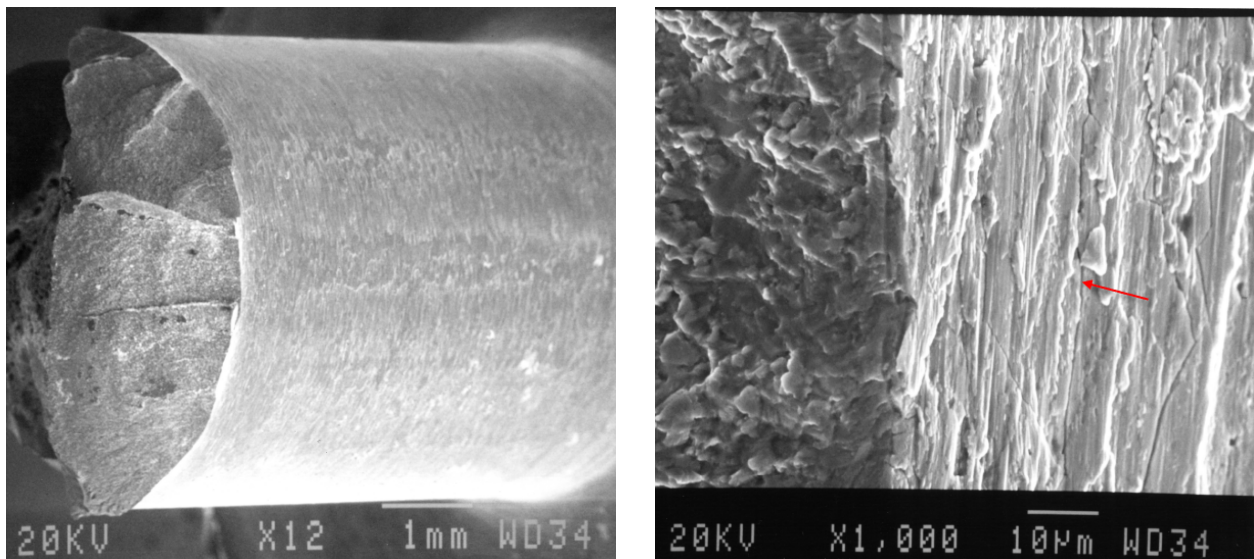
and 15b. Smeared metal on breakstud #1 reduced section surface from grinding (left). Grinding marks and secondary cracks (red arrow) on breakstud #3 surface (right).
